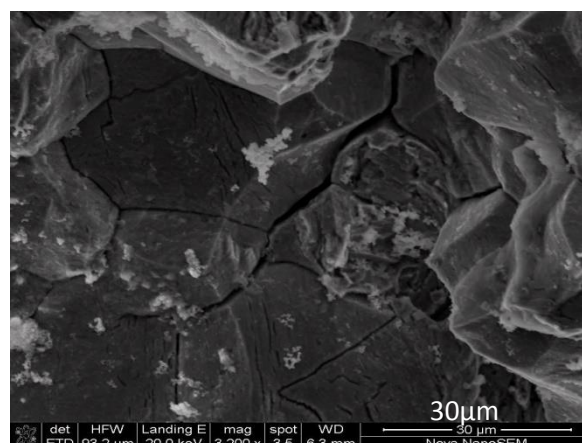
Fracture surface of 480°C temper U-bend specimen, showing grain boundary separation
